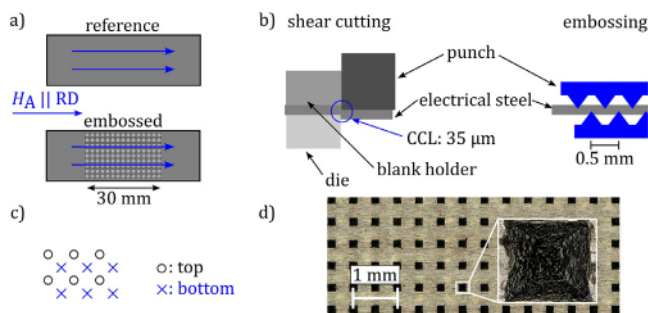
a) Sample geometry, edges are shear cut or wire-cut; b) sample preparation; c) embossing geometry; d) image of an embossed specimen.
